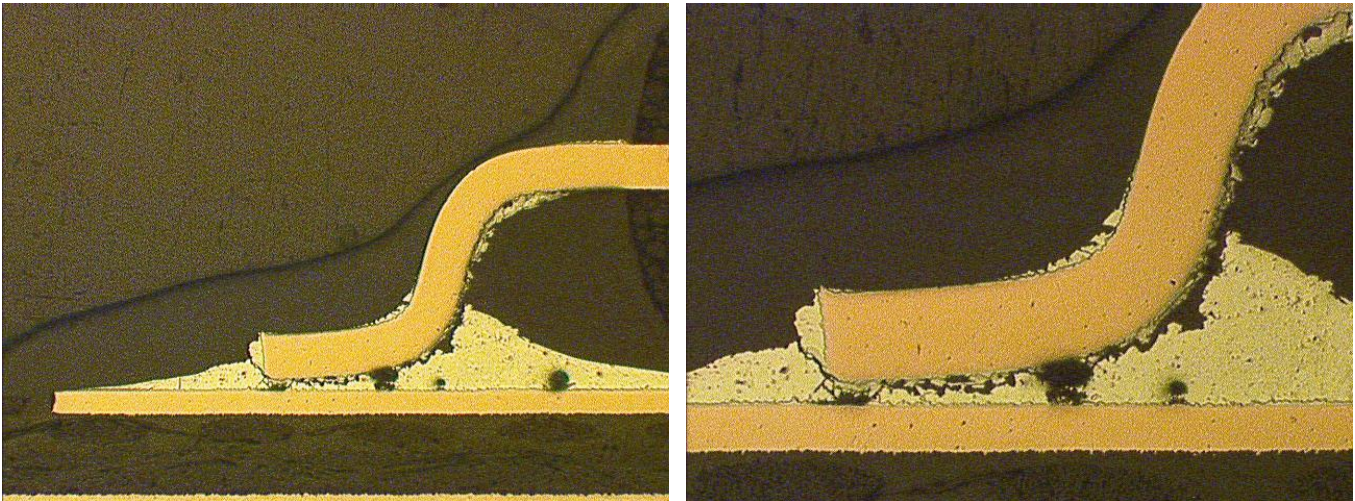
TQFP-144 Solder Joints, Board 164, Component U7, SAC305/SAC305, Failed @ 2359 Cycles
